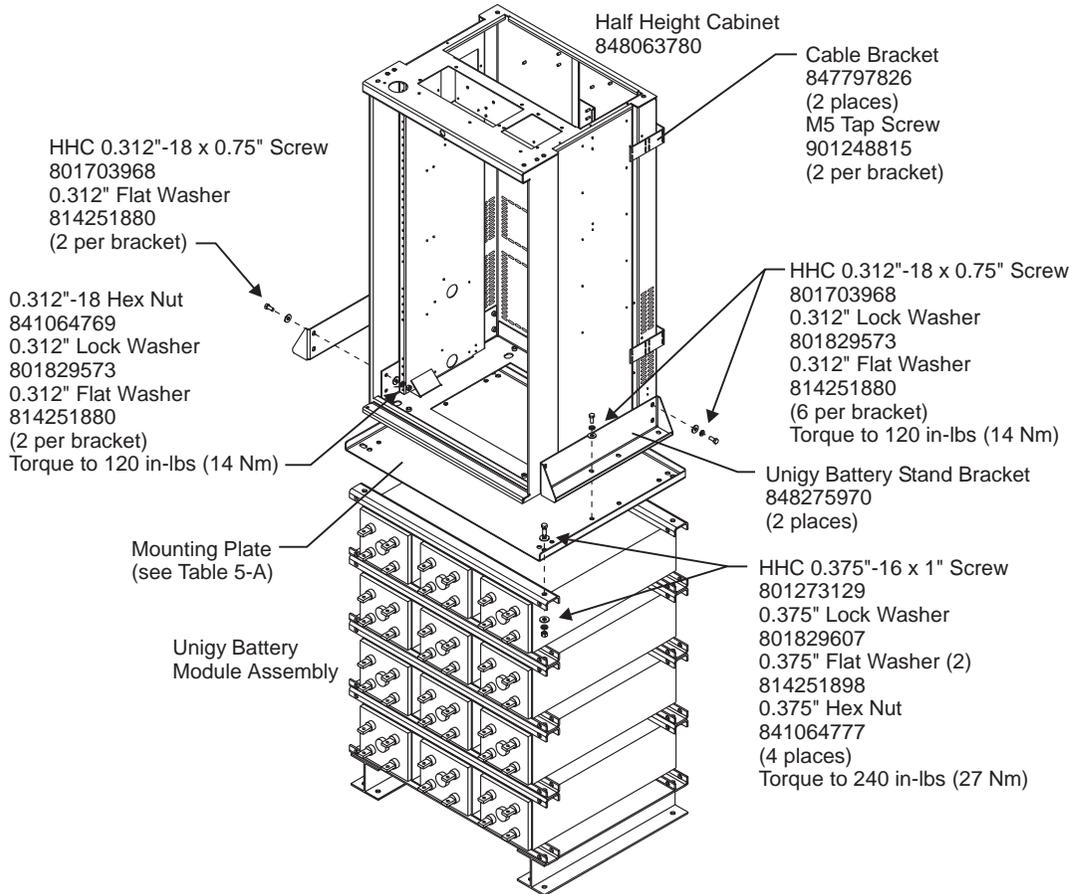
Half-Height Cabinet on a Unigy Battery Module Assembly
